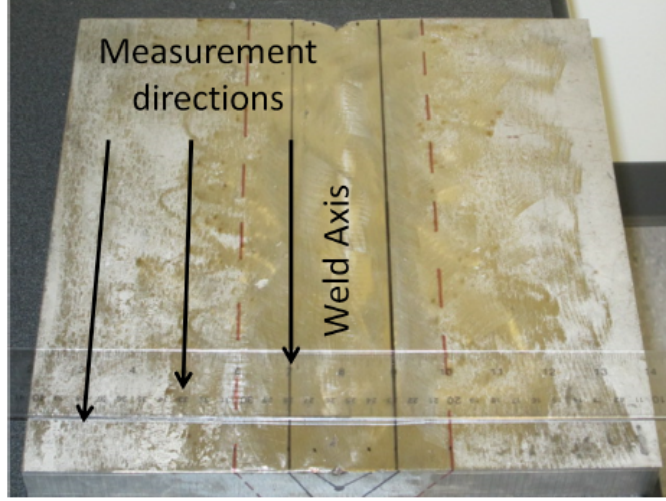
Plate with V-shaped cut, weld axis and measurement direction [15]
